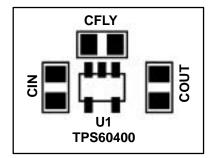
Recommended PCB Layout for TPS6040x (top layer)
